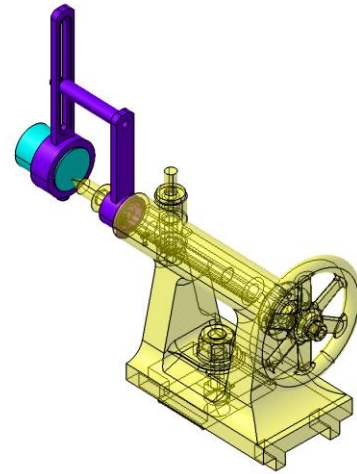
Isometric view (rear) of jig assembly to tail stock
